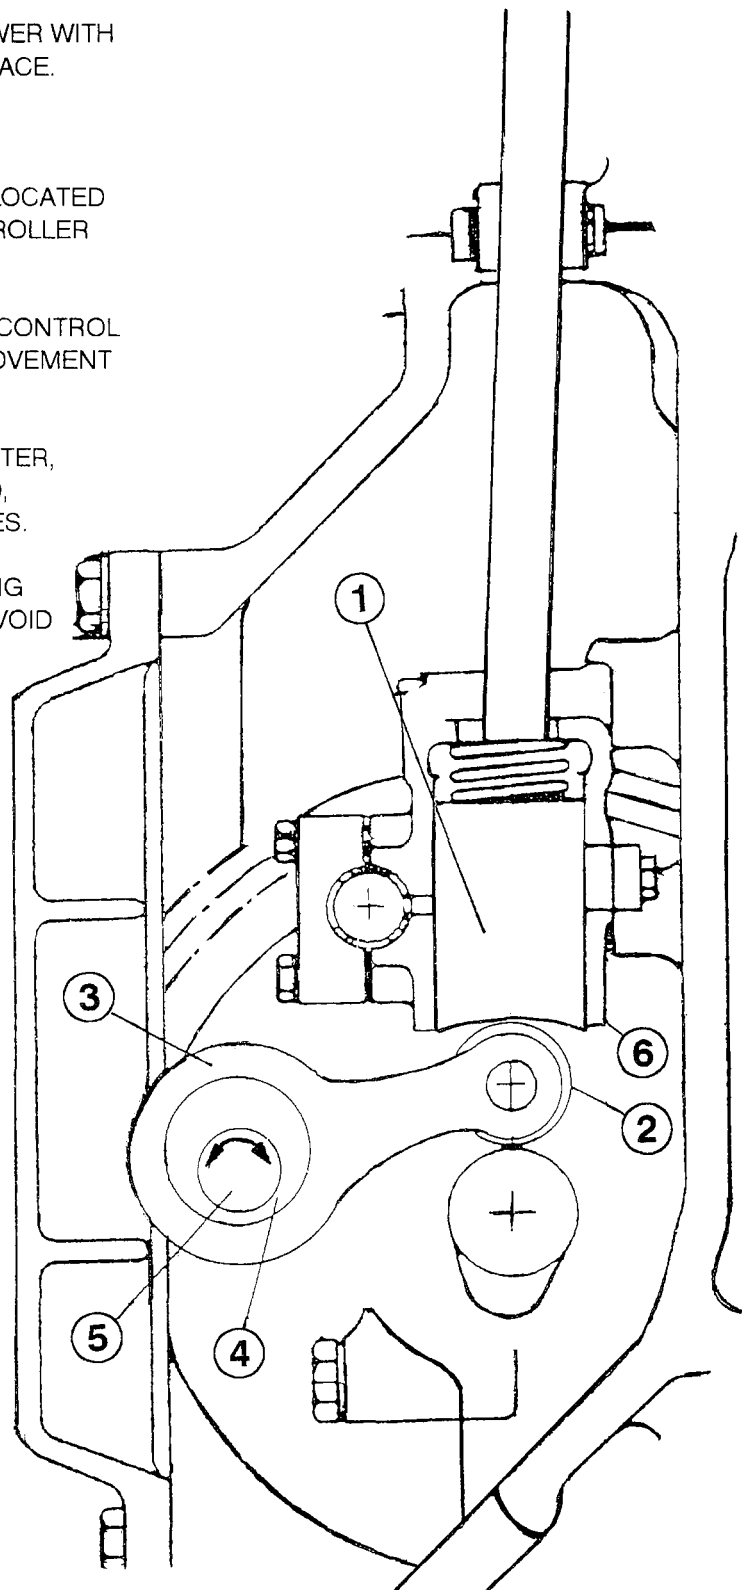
SECTIONAL DRAWING OF THE VVT MECHANISM USED
